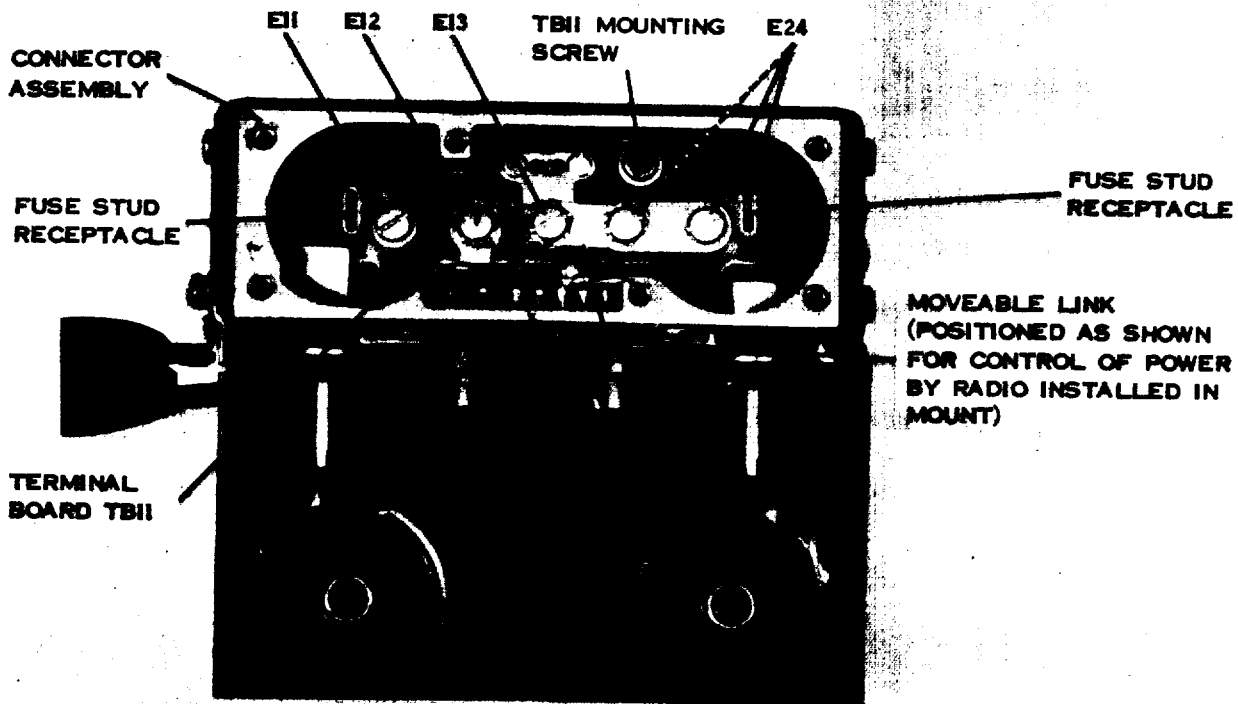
MT-1898/VRC, tray assembly and mounting assembly, parts location.
